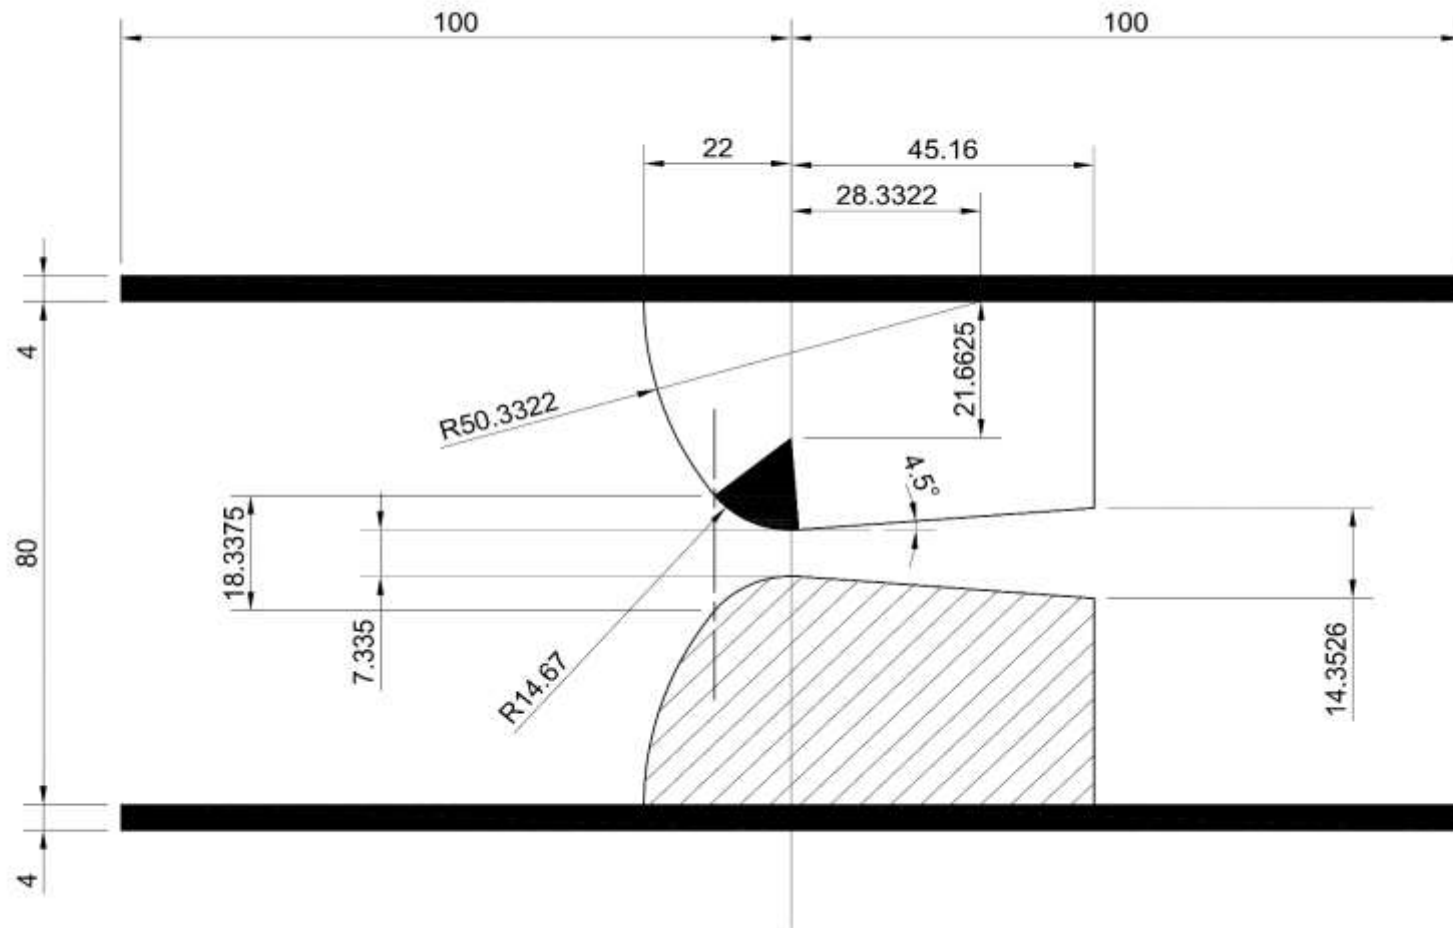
Design drawing of sonic nozzle for metering an air flow rate of 0.06 kg/s
